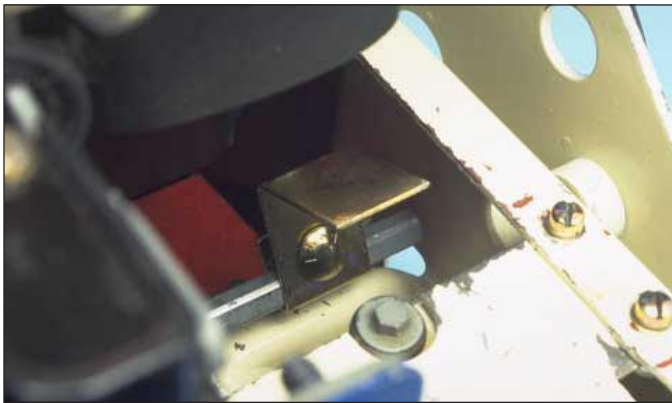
Trip Paddle Mounted to the Breaker Trip Bar
